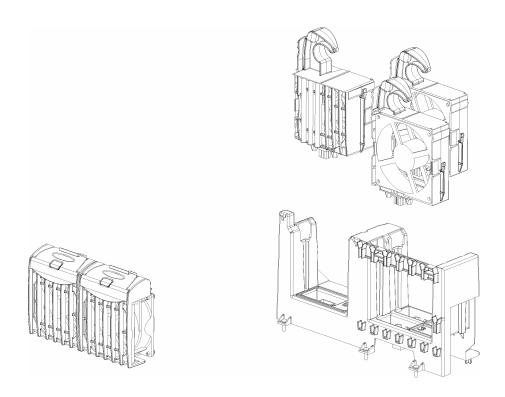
Close Up View of Redundant Hot-Swap Fan Assemblies
